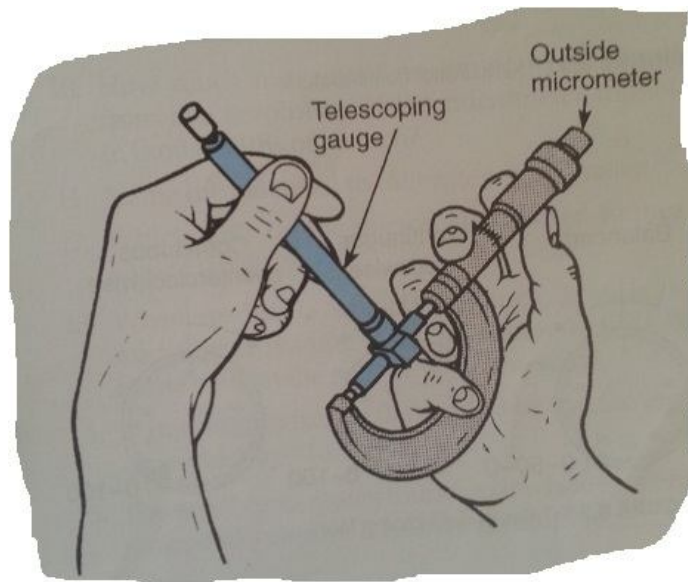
Measuring with a micrometer screw gauge readings taken with a telescoping gauge
